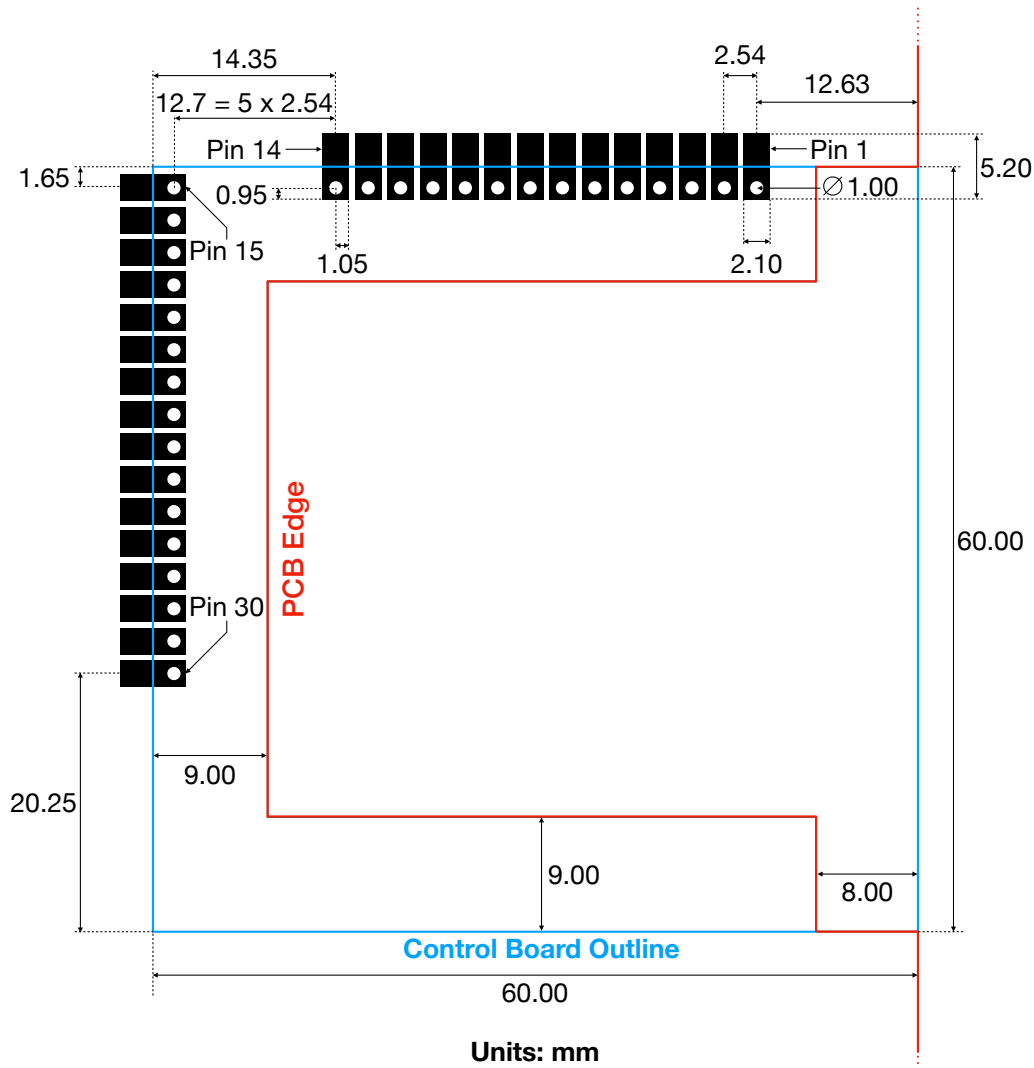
Recommended PCB Land Pattern for the Control Board. Drill Holes Are Optional.
